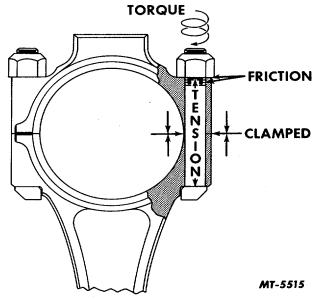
Connecting Rod Cap, Bolt and Nut Details
